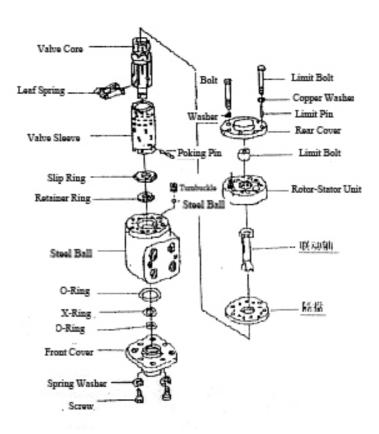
Drawing for Disassembly and Assembly of Steering Unit
